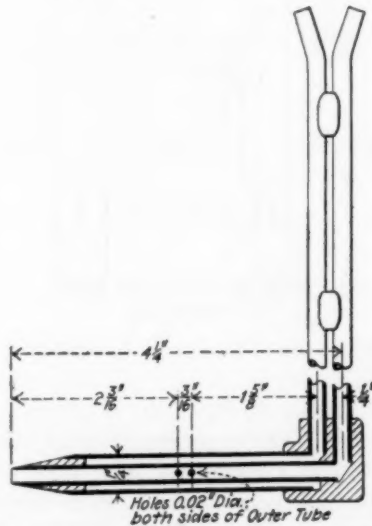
DIMENSIONED SKETCH OF PITOT TUBE Y
